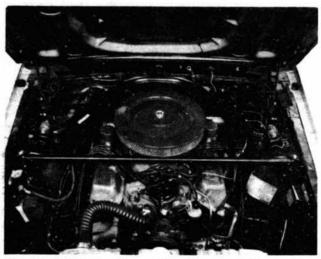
Spring Tower Cross Brace and Export-Type Spring-Tower-to-Dash Brace Installation.
